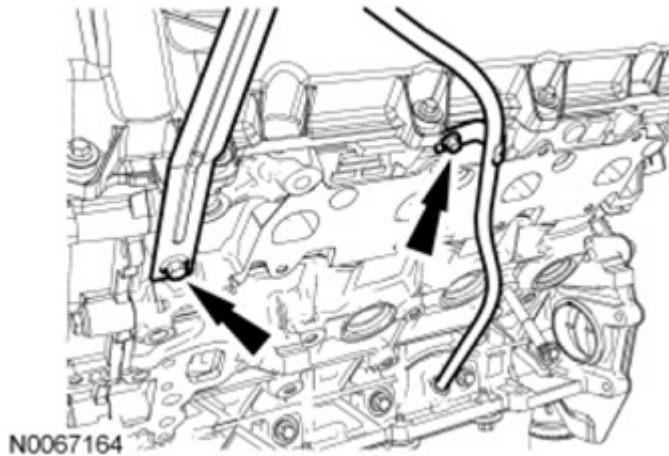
Locating Oil Level Indicator Tube And Bolts
